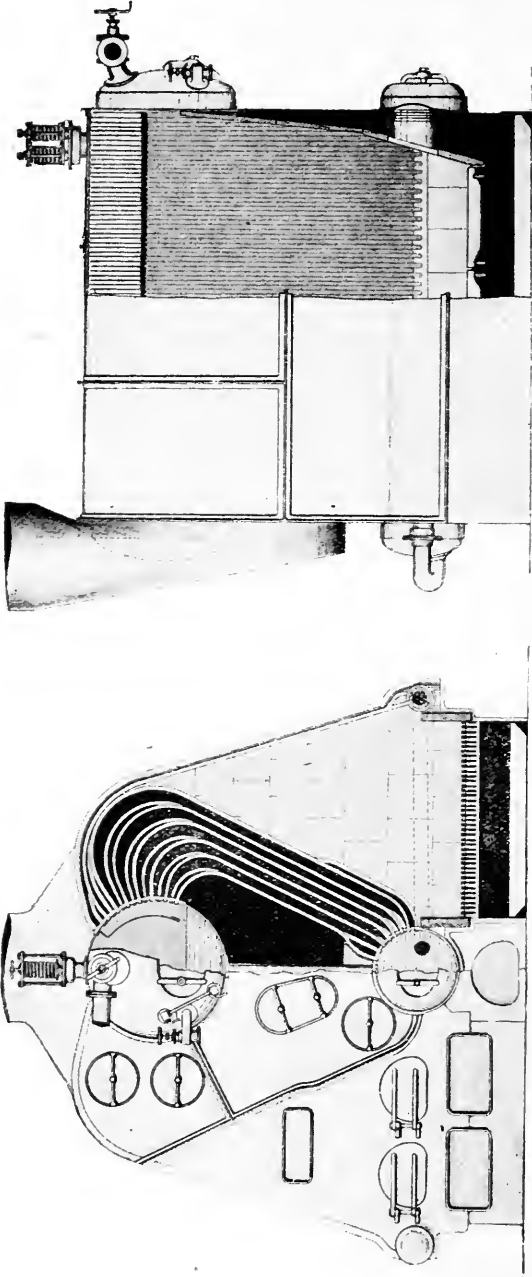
Thornycroft Boiler, the "Daring" Type.
